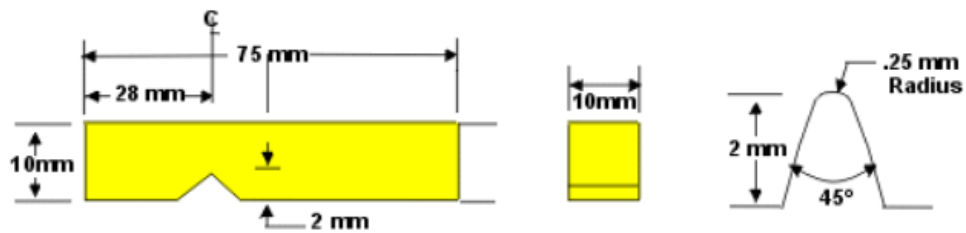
15: Izod Impact specimen dimension (ASTM E 23-02a)
